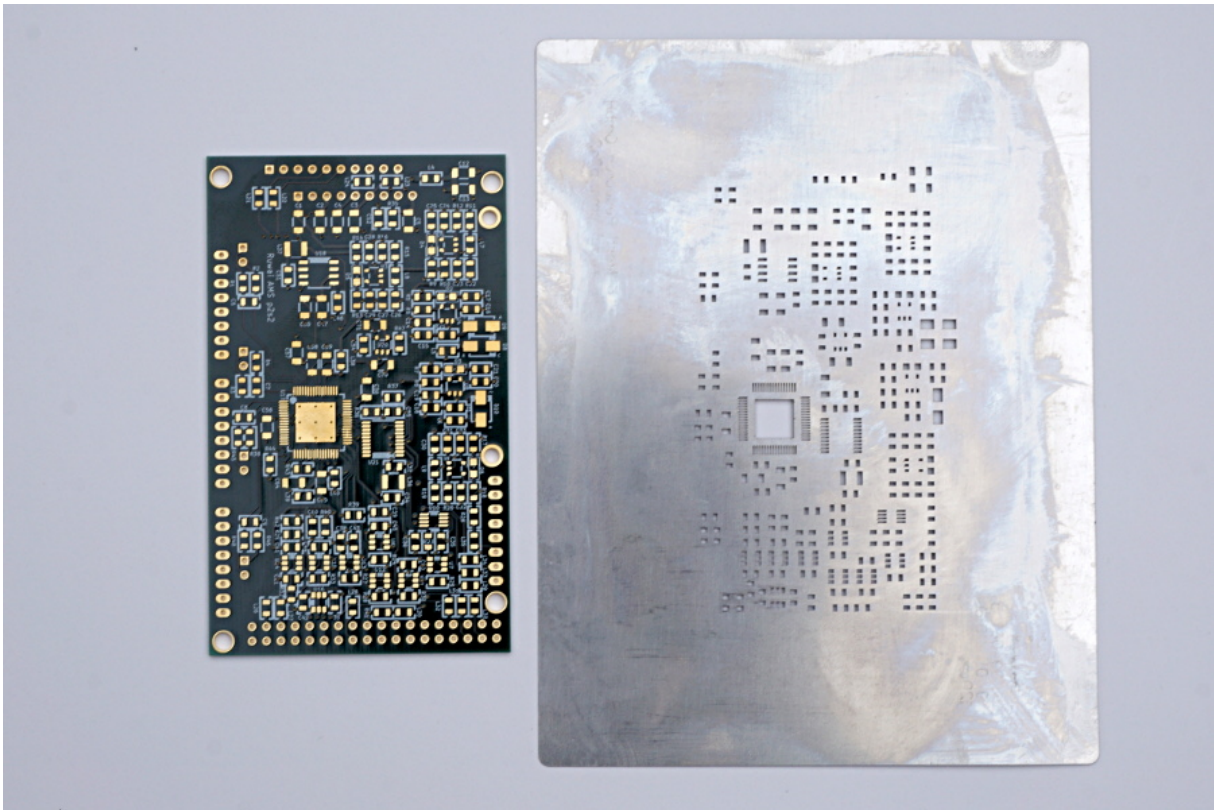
Clean printed circuit board (left) and the corresponding metal solder paste stencil (right).
